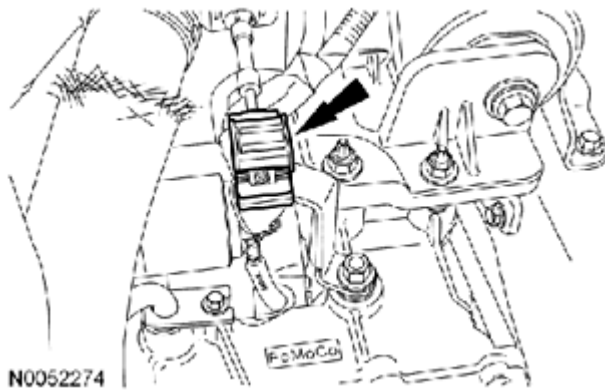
Adjusting CKP Sensor Using Crankshaft Sensor Aligner
